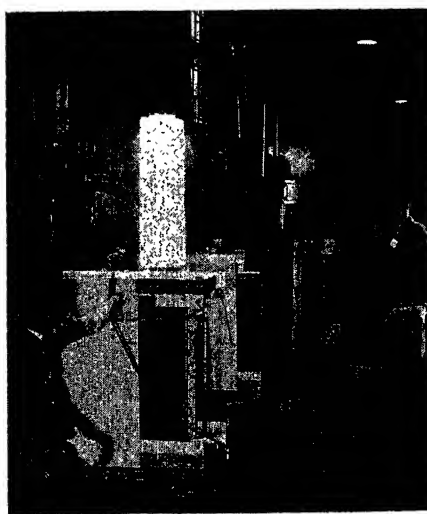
A hot 8- by 8- by 32-inch carbon steel billet being removed from a test coil
